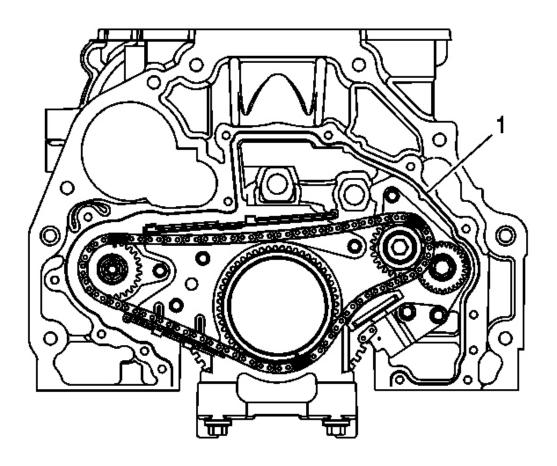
Locating Rear Block Sealing Surface Adhesive Courtesy of GENERAL MOTORS CORP.
